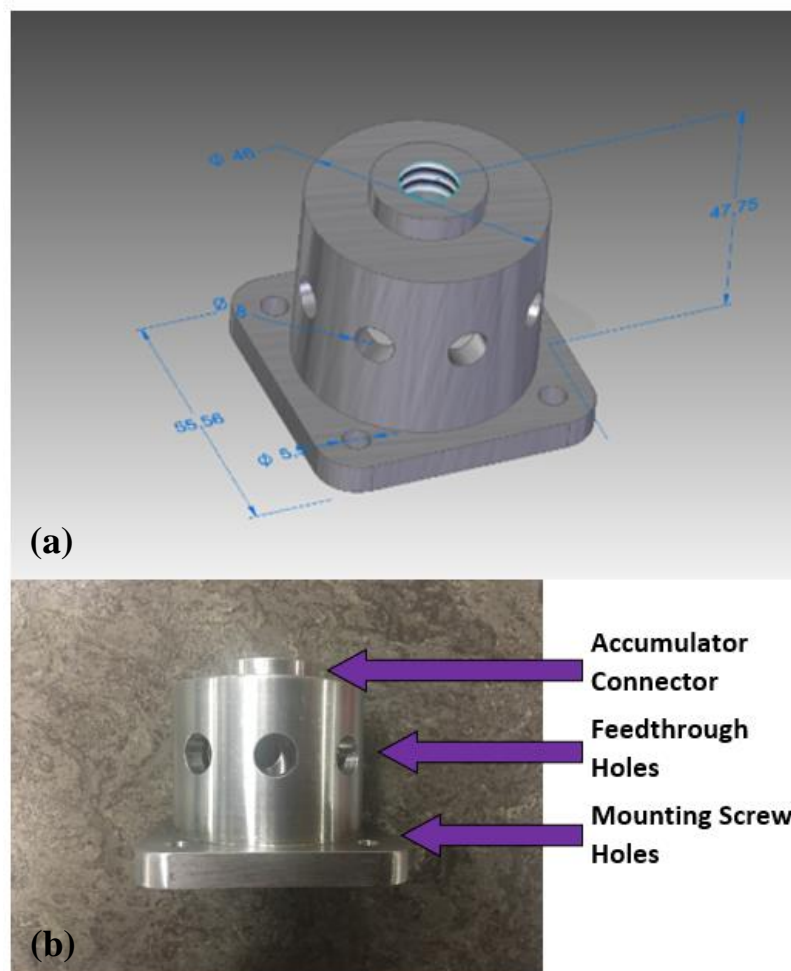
End cap for motor end seal. (a) End cap model and dimensions. (b) Side view of the End cap
